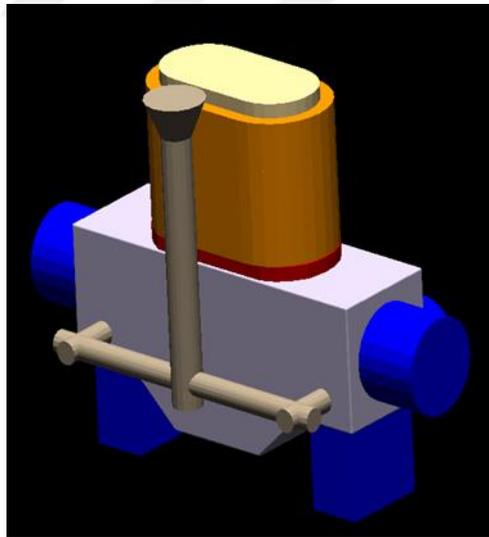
Technical drawing on Magmasoft *Photo is taken by Sezgi ÇELİK
